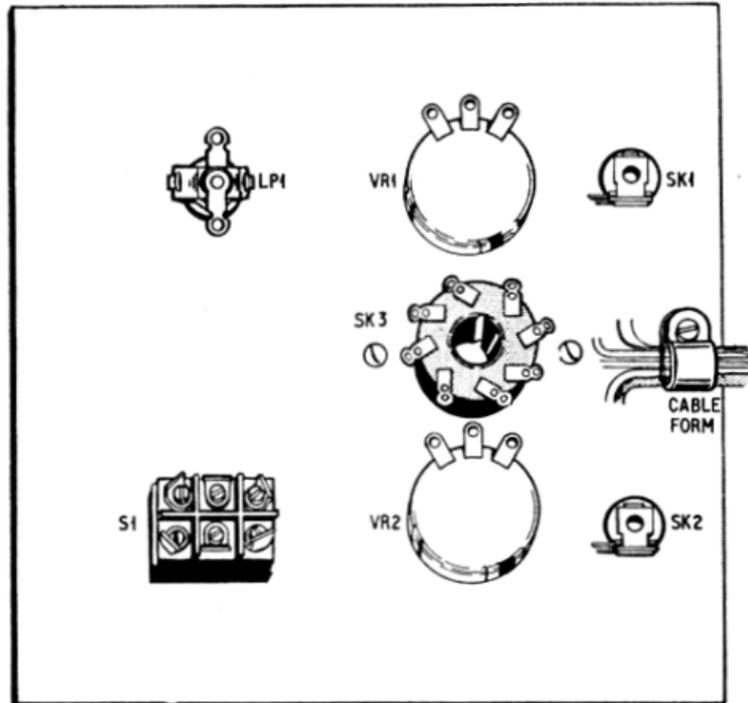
Control panel layout. Socket SK3 links with the remote controls on the guitar. Sockets SK1 and SK2 are the signal input jacks
